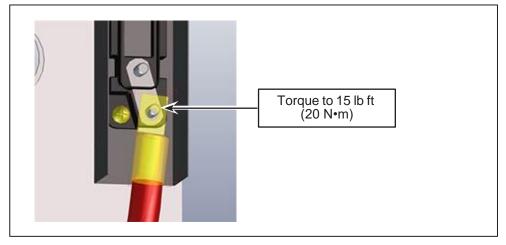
Torque Value on the Lower Connection of the Fuse Holder
